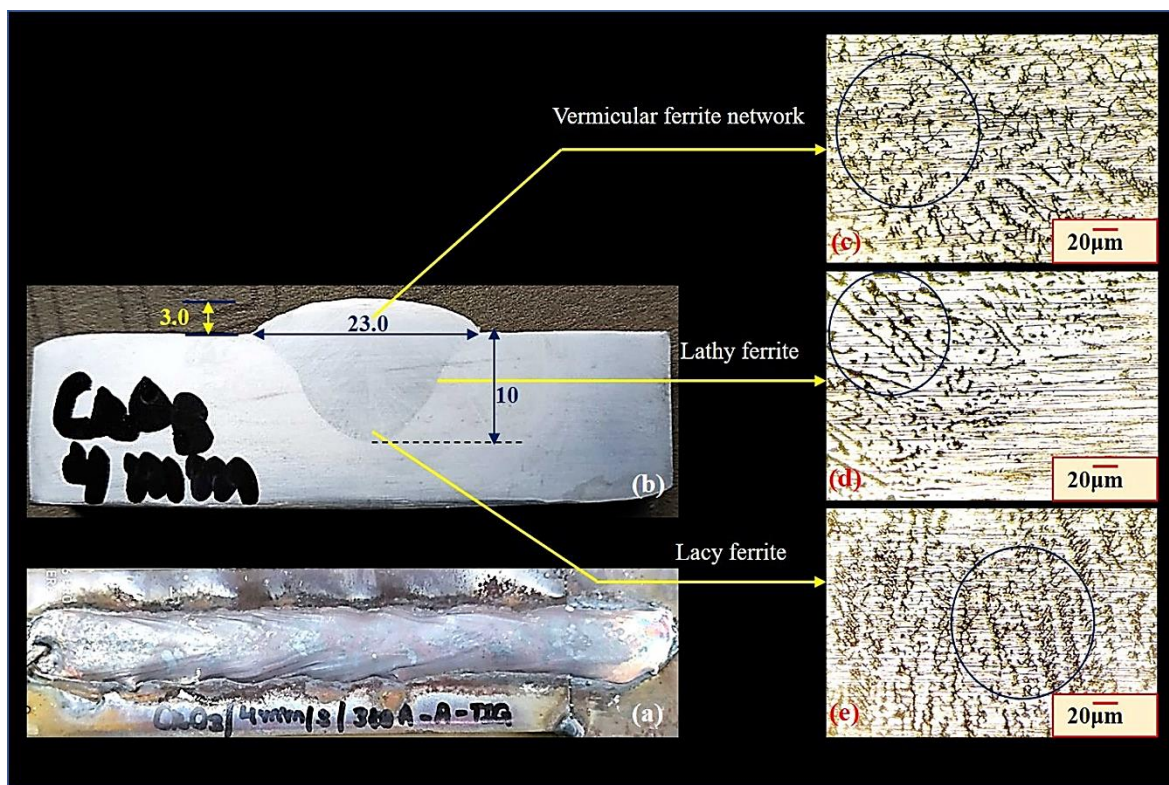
Photograph contains (a) Hybrid welded coupon using CrO_3 flux at 4 mm/s welding speed (b) Macrograph of the etched specimen (c), (d), and (e) showing the microstructure of different regions of weld bead
